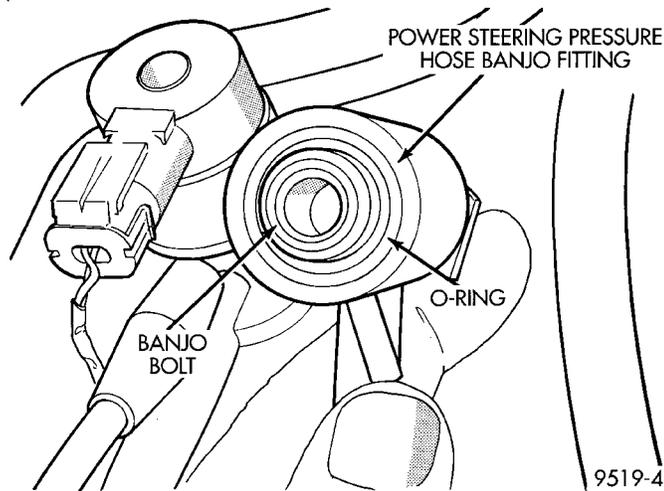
O-ring Installed On Power Steering Hose Banjo Fitting
